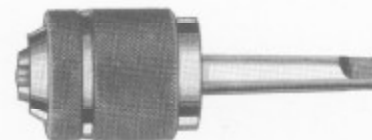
Special chuck with brass jaws for tailstock spindle of the lathe.
